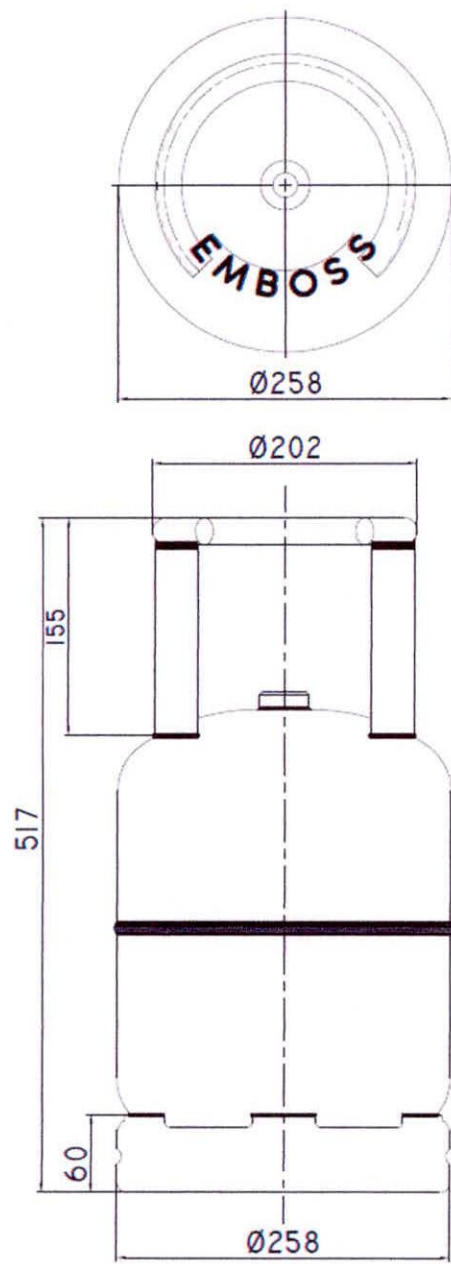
7.0 kg 258 mm diameter assembly details
